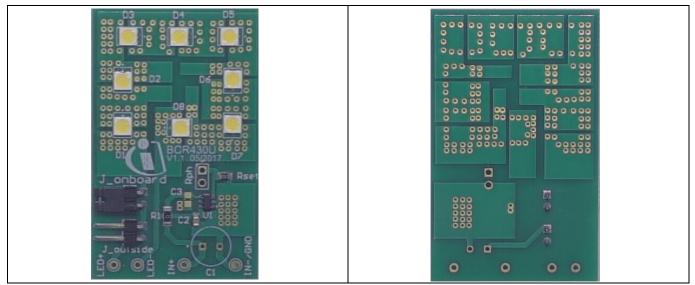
Top and bottom side of the reference design board (55.1 mm x 33.7 mm)
